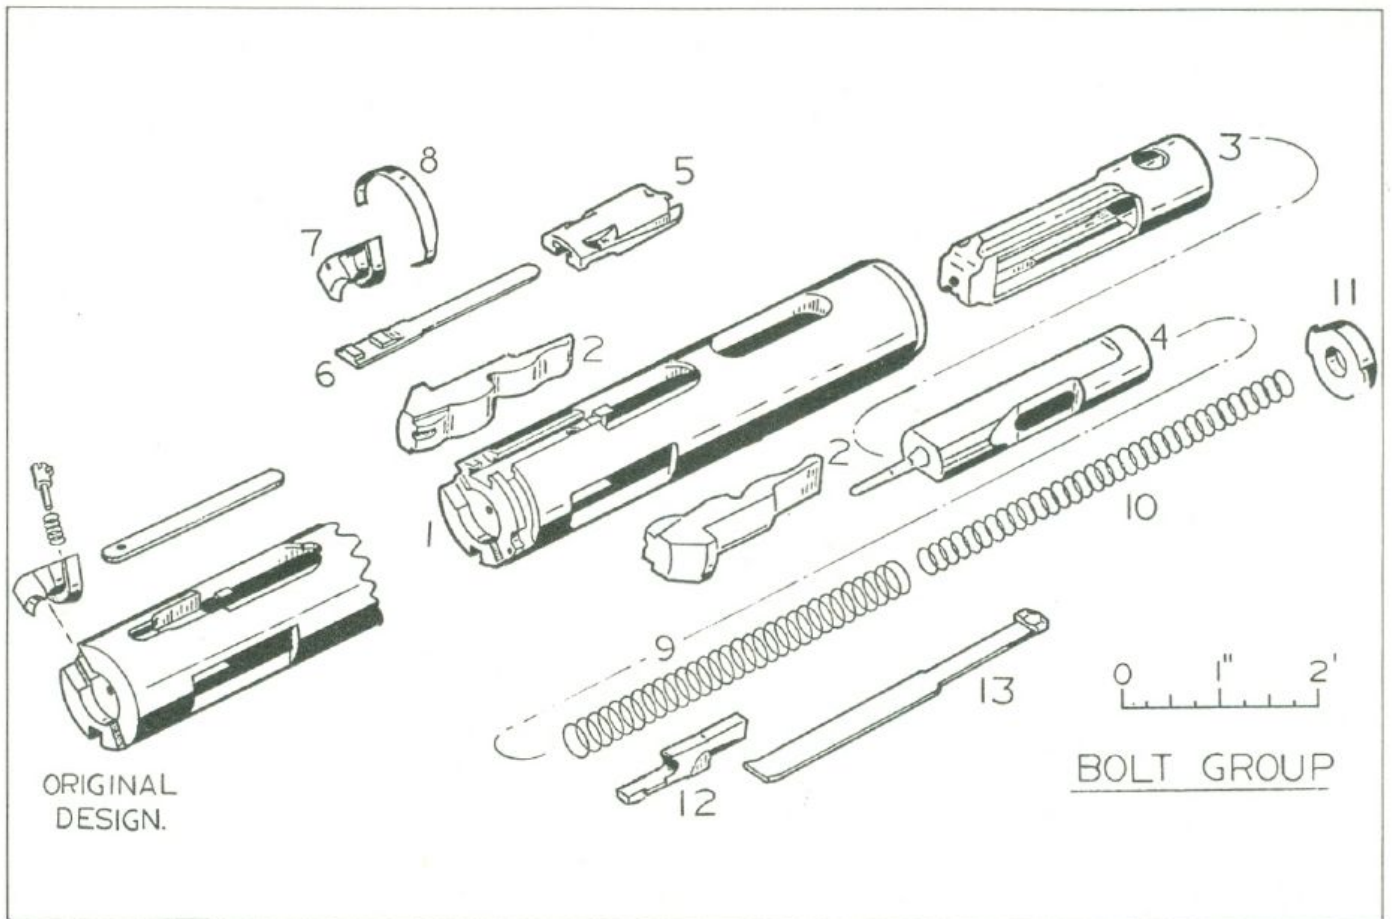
Exploded Isometric drawing of the EM-2 Bolt System with modifications
